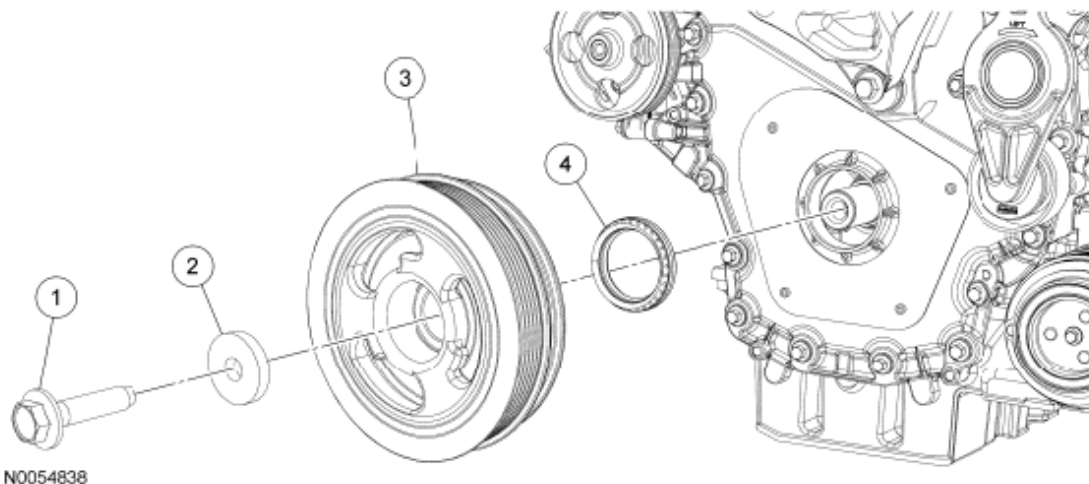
Identifying Crankshaft Front Seal, Crankshaft Pulley, Crankshaft Pulley Bolt & Washer
